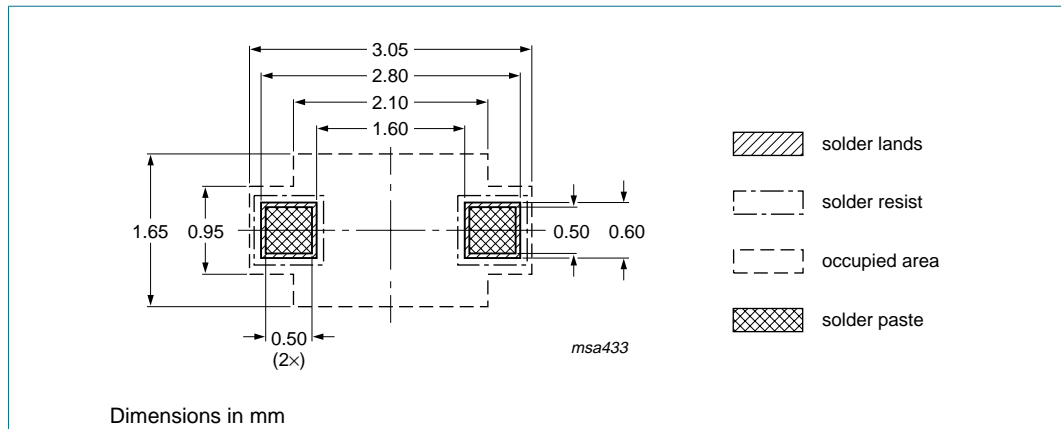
Reflow soldering footprint SOD323 (SC-76)
